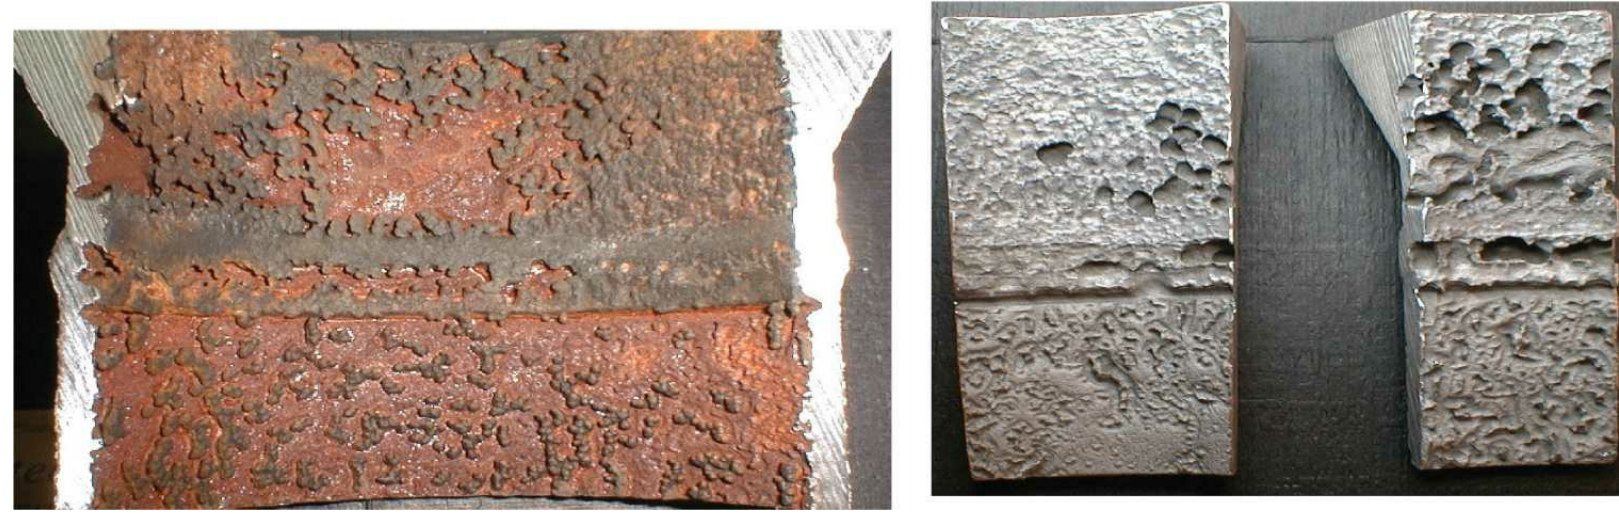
Preferential weld metal corrosion with pitting attack on base metal
